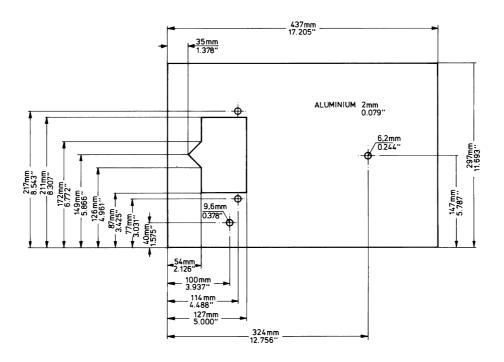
Mounting panel AN 3500 for TIC test box
